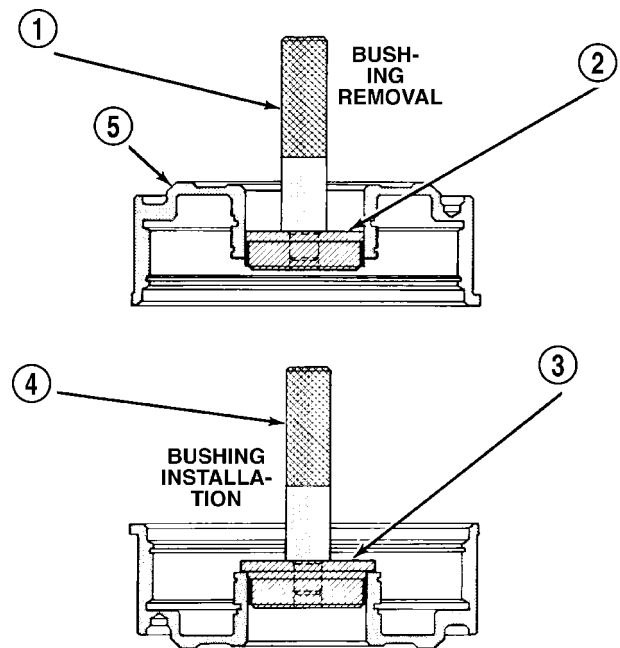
Front Clutch Retainer Bushing Replacement Tools
